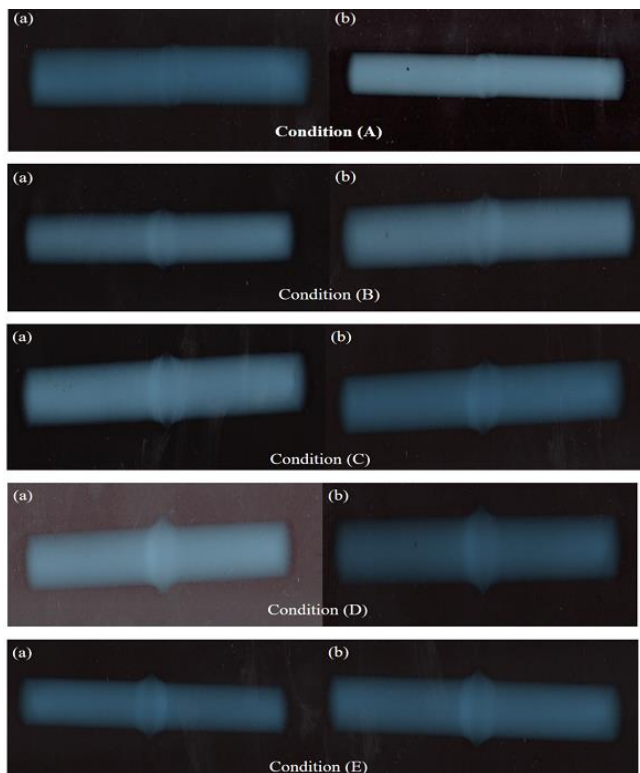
X-rays of welded joints (conditions A, B, C, D and E).
